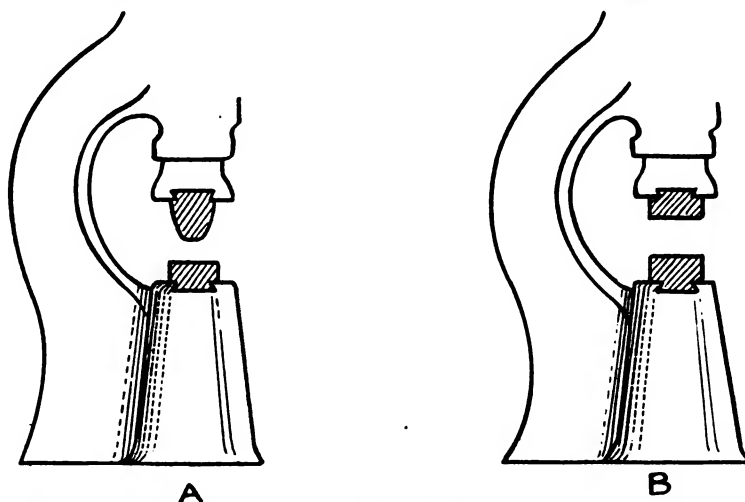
A—HAMMER FITTED WITH SHARPENING DIES. THIS STYLE OF TOP DIE IS ALMOST USELESS FOR FORGING.
